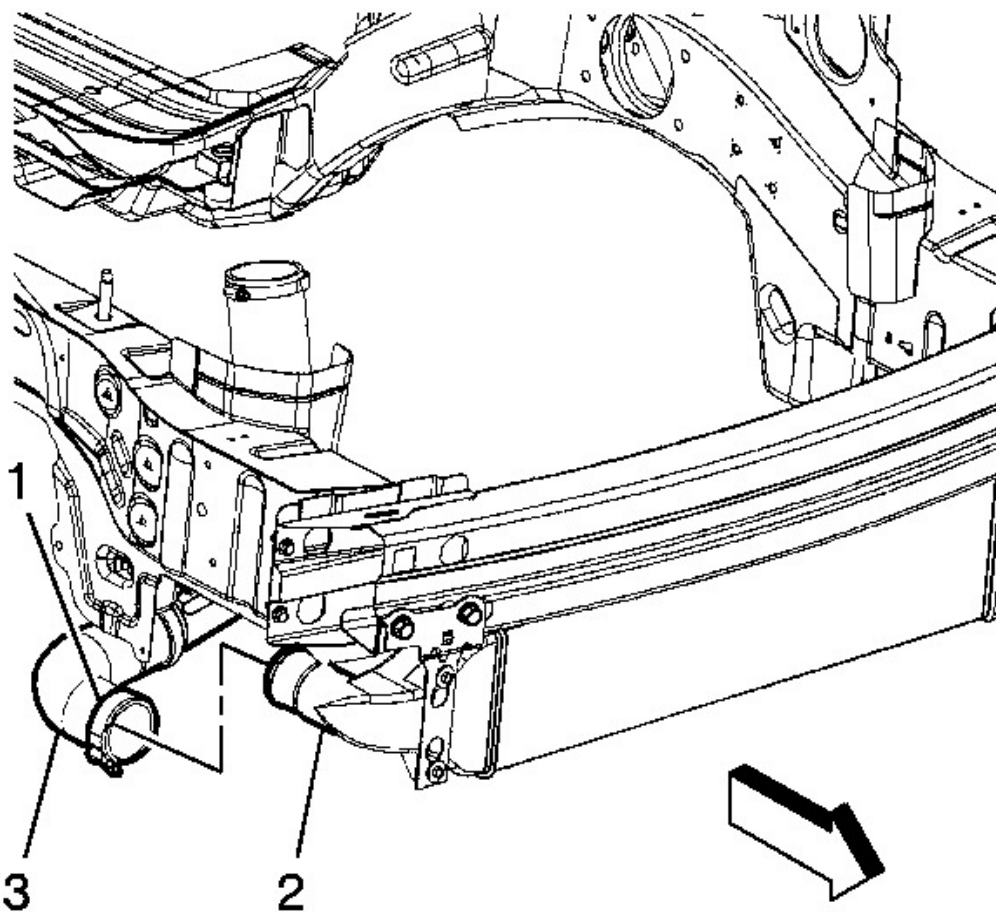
View Of Charge Air Cooler Outlet Pipe Clamp & Charge Air Cooler Assembly
